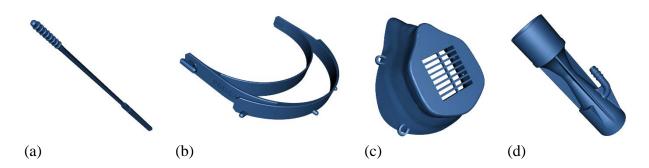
3D-printable designs of various medical equipment: (a) nasopharyngeal testing swab, (b) face shield head-band, (c) face mask, and (d) venturi valve [6]
